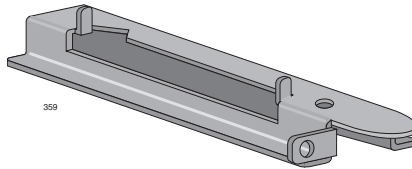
Mounting Guide Comes with the AT-MCR12 Chassis
